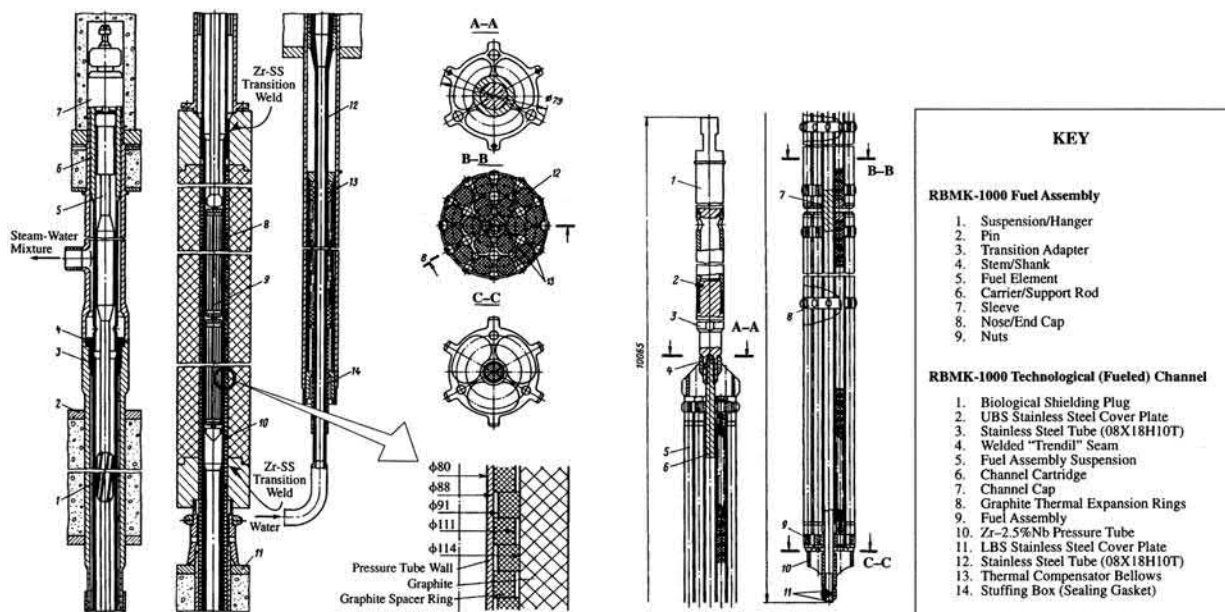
Cross-sectional views of RBMK Fuel Channel and Assembly (Sich, 1994a).
